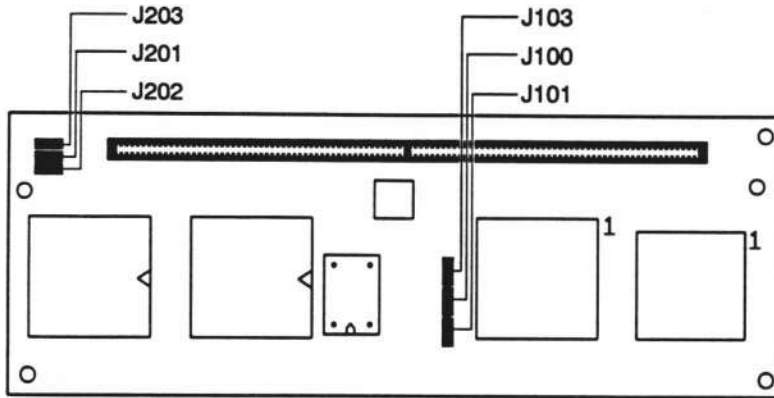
68020/68030 Processor Card Jumper Locations
